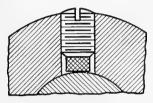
A further improvement is a brass plug making a loose fit with the inside diameter of the threaded hole.
